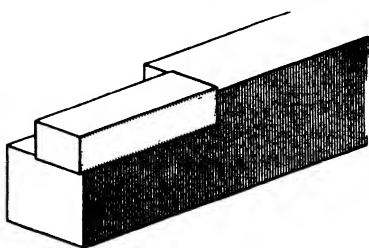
A Side-Cutting Tool with Rabbet Recess
